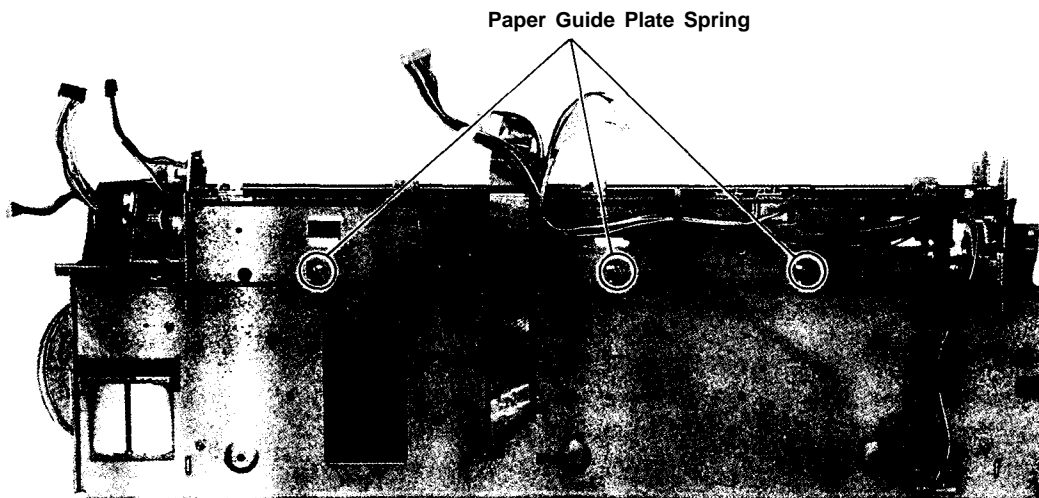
Paper Guide Plate Spring Removal (Back of Base Frame)
